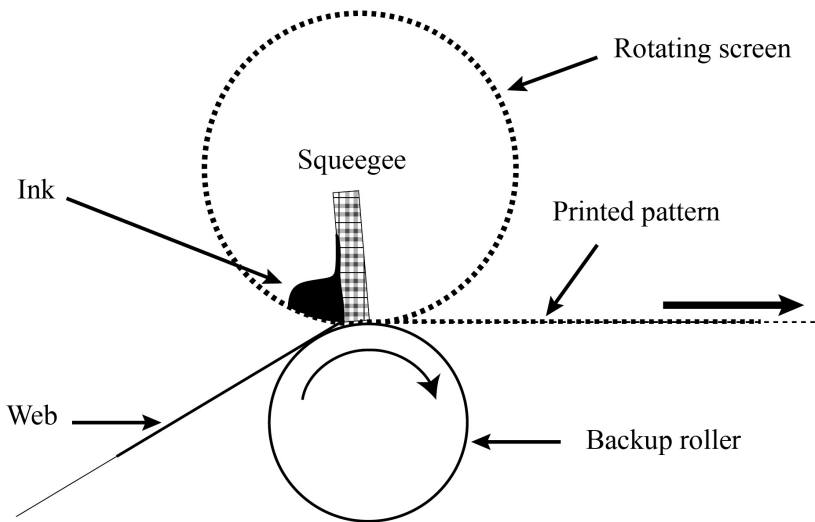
Schematic drawing of a rotary screen printer <sup>109</sup>.
